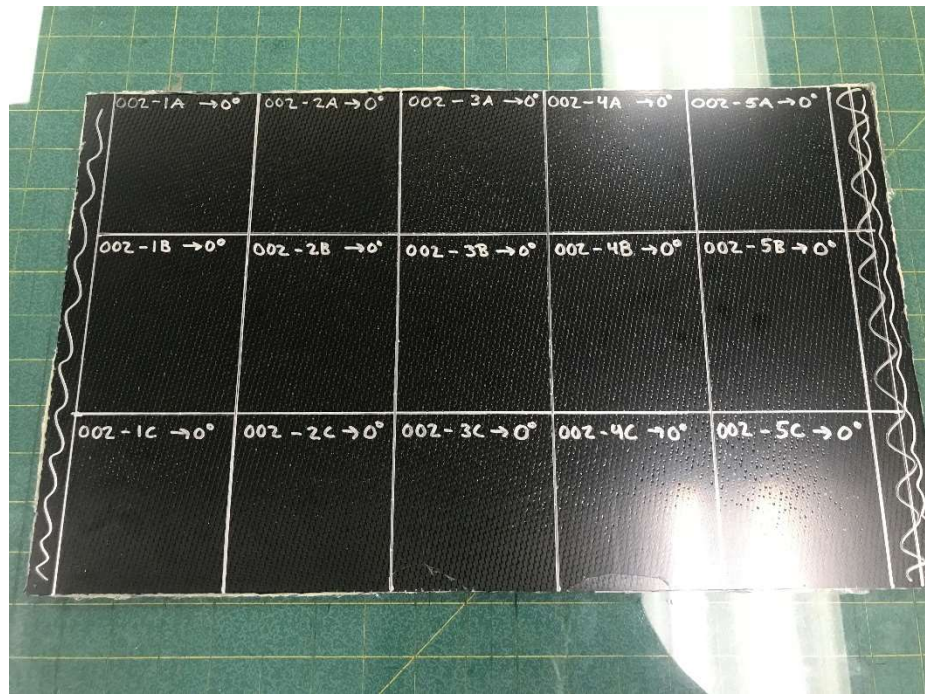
Tool Side of Panel 002 with Cut Lines Drawn
